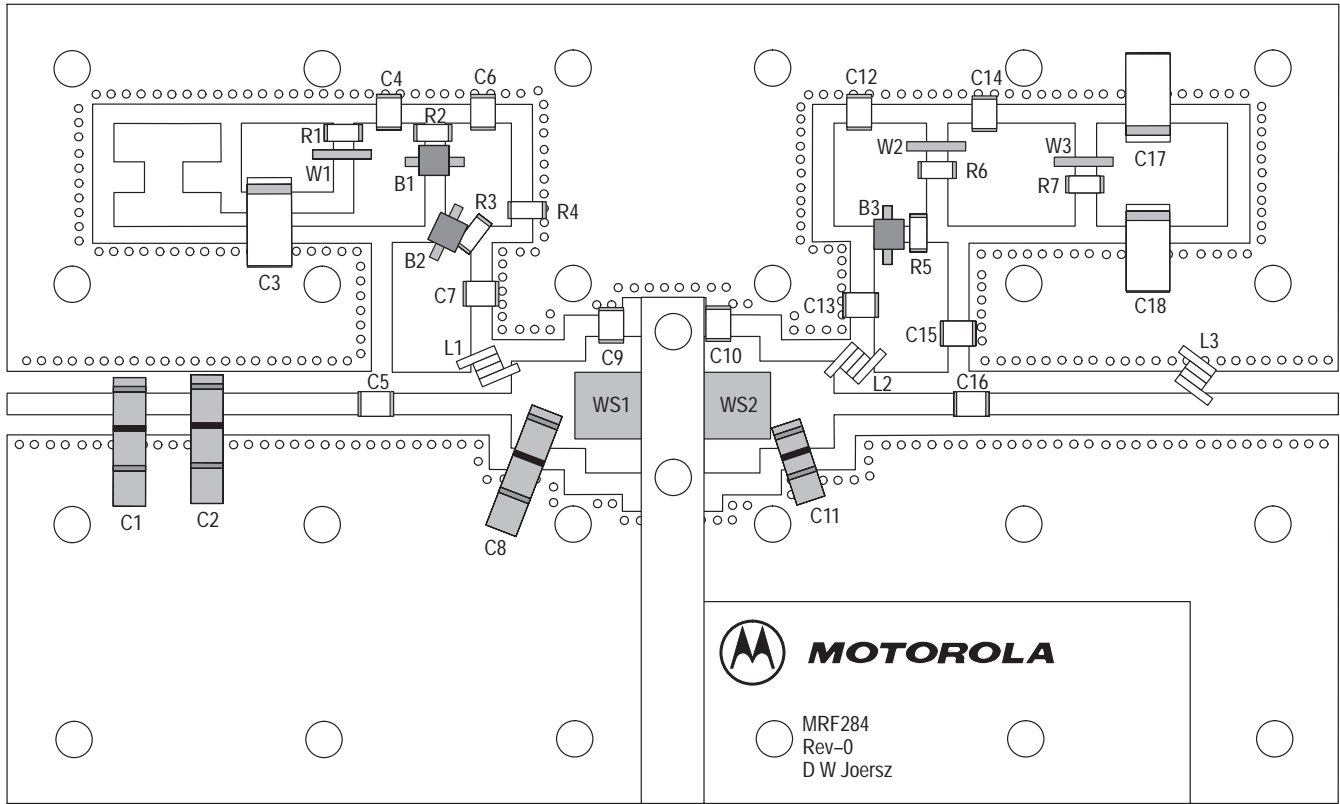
1.93–2.0 GHz Broadband Test Circuit Component Layout
